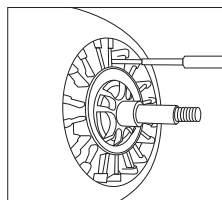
Screw out the screws with a hexagon socket screwdriver and remove the cowling.
